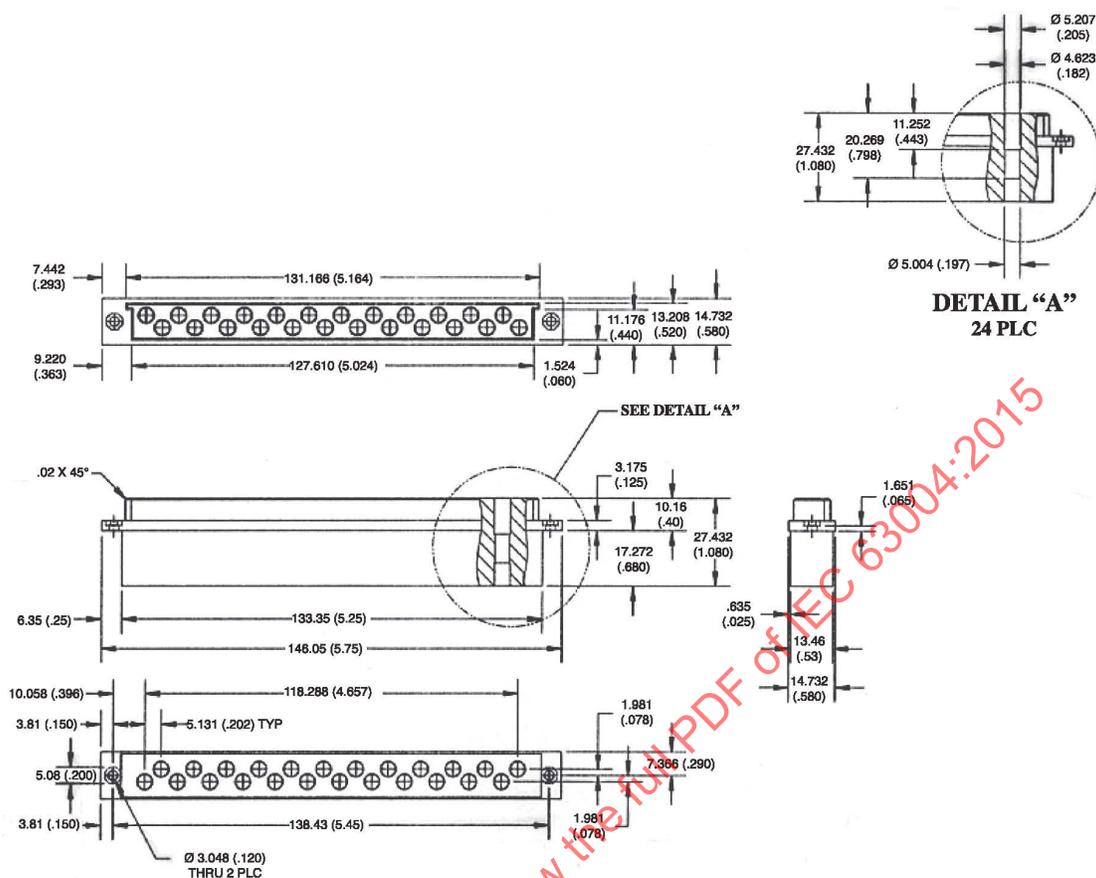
Universal size 8 D-Sub compatible module connector, 24 position, fixture housing physical layout
